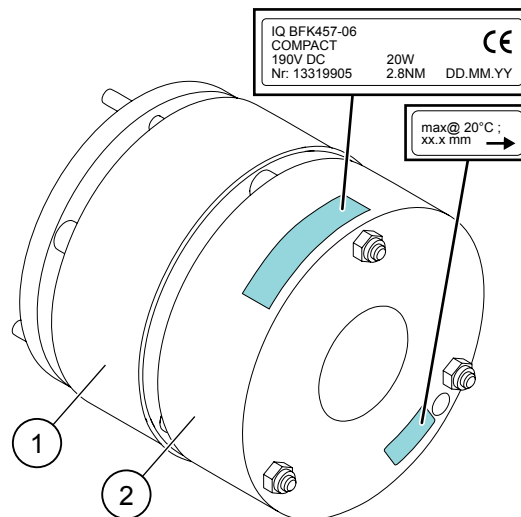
Double brake - INTORQ (SL05-SL10, SR25)
